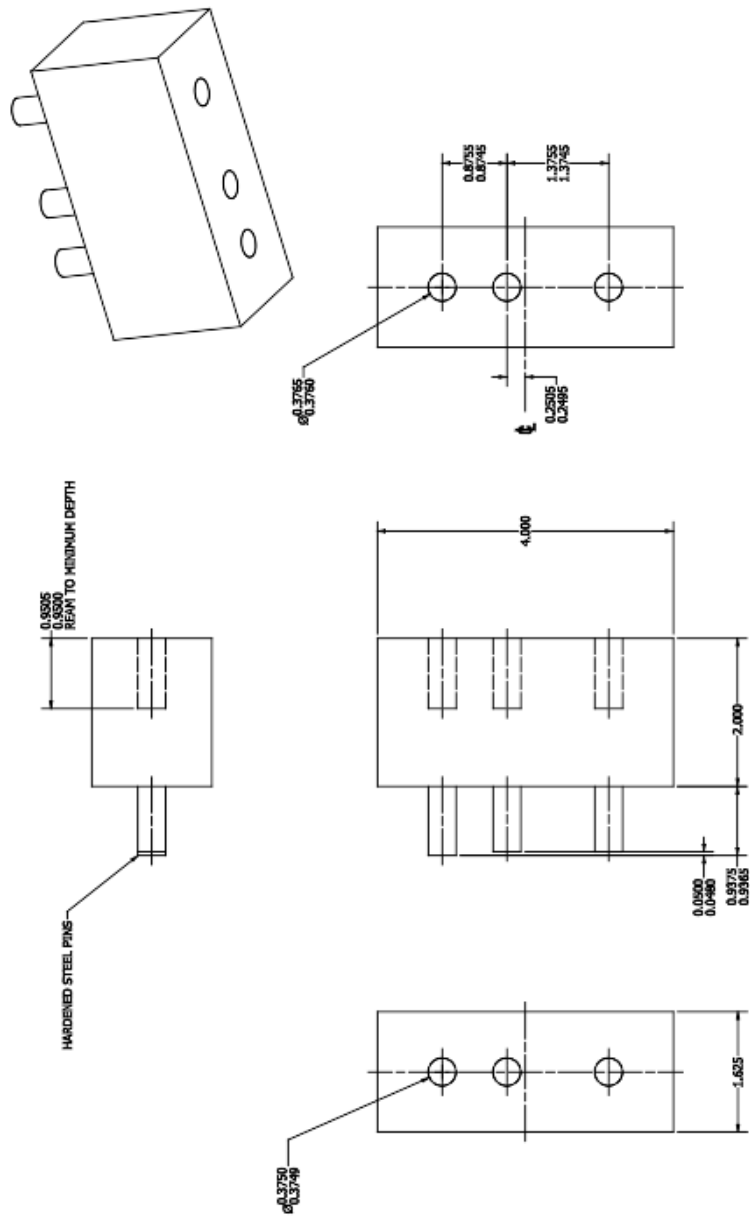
Pin and sleeve alignment test fixture - 60 ampere device (5T60)
